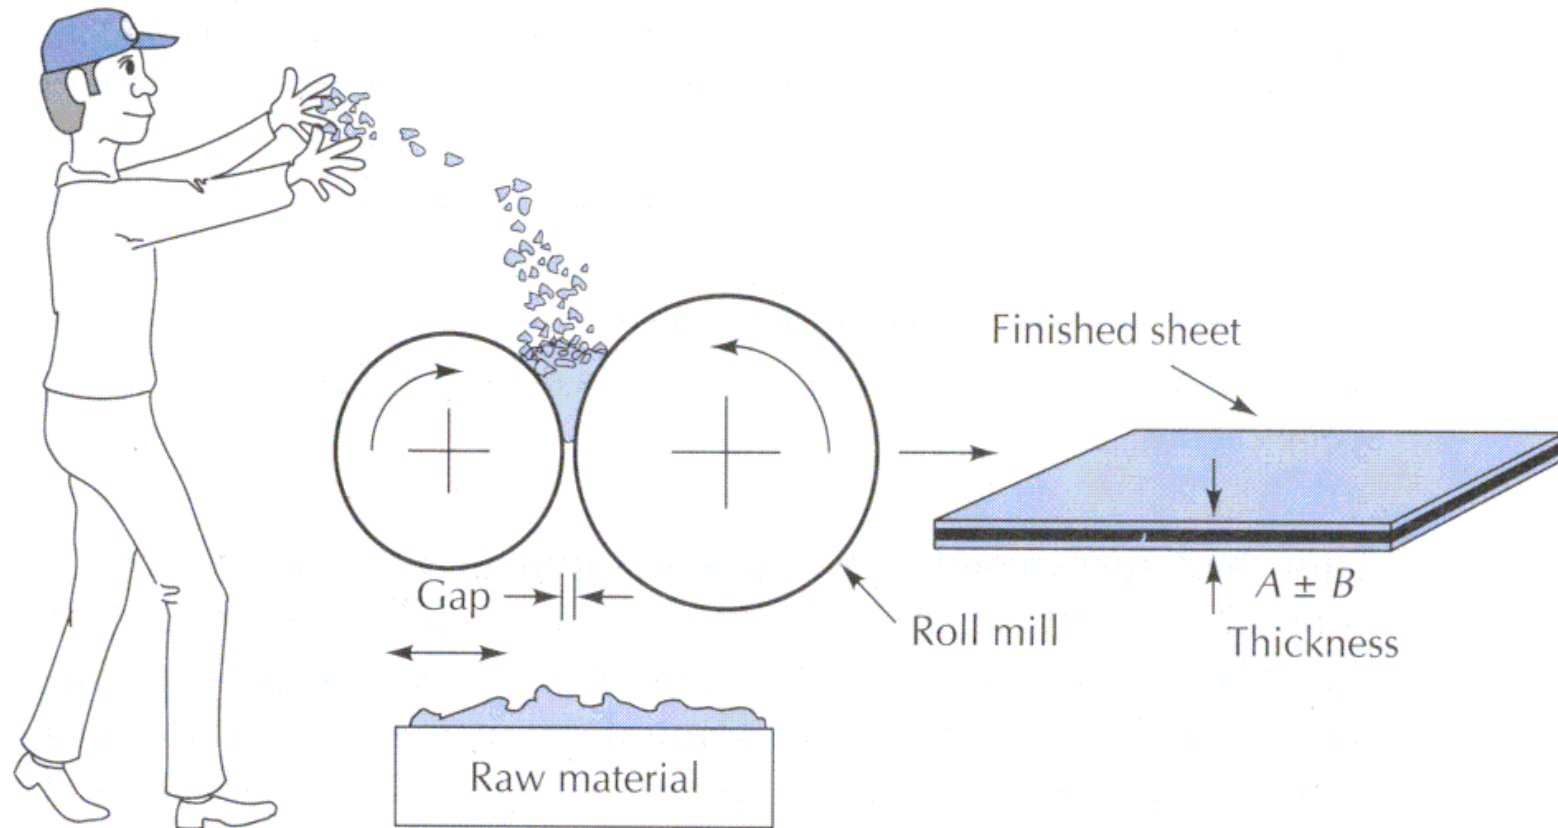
The Process: Roll Mill for the Manufacture of Soft Gasket Material
